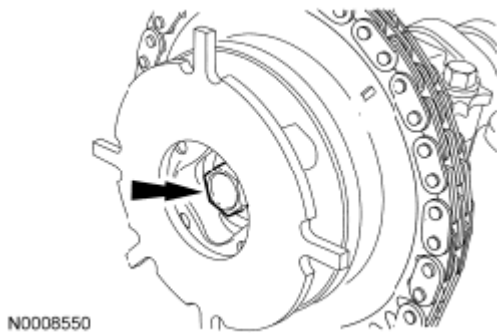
Identifying Camshaft Phaser And Sprocket Assembly Bolt
